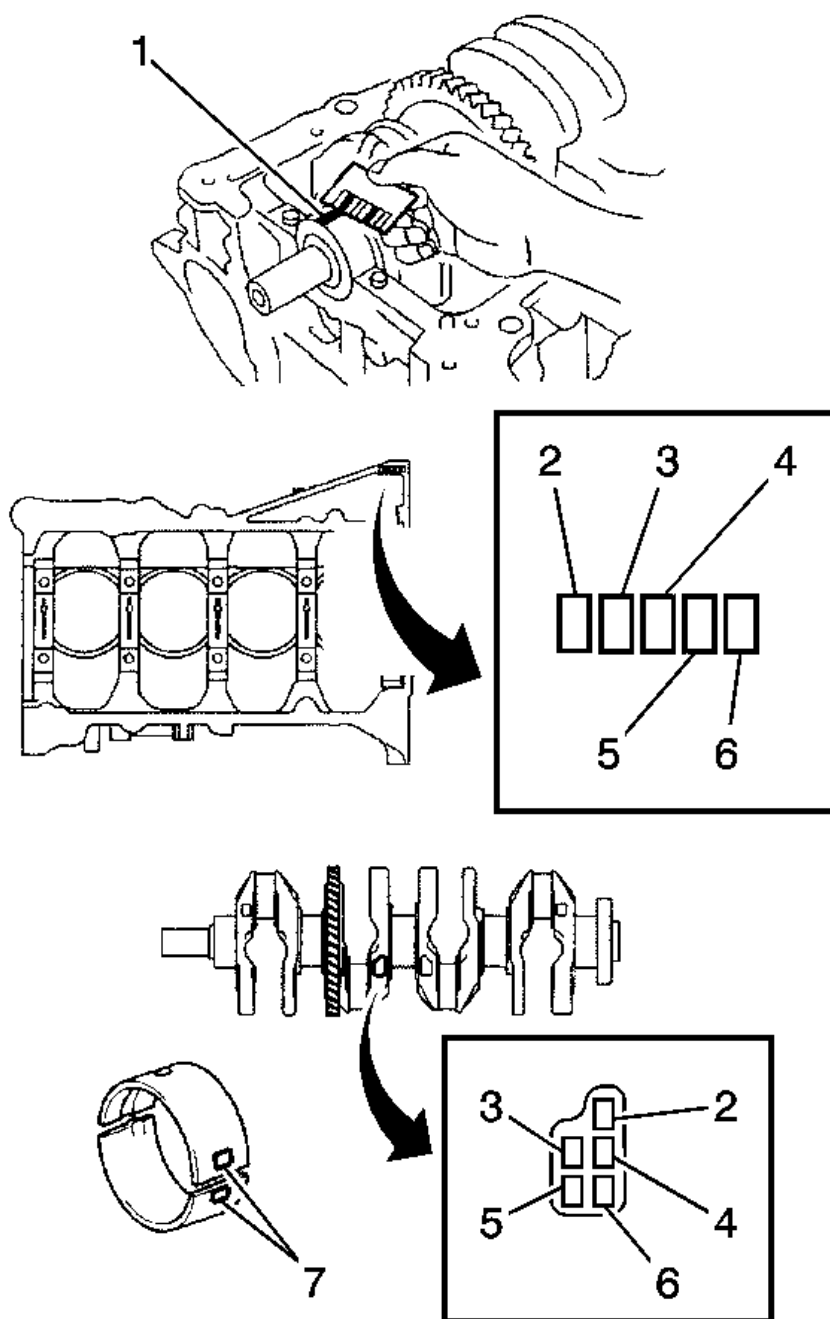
View Of Keeping Caps & Bearings In Proper Order
